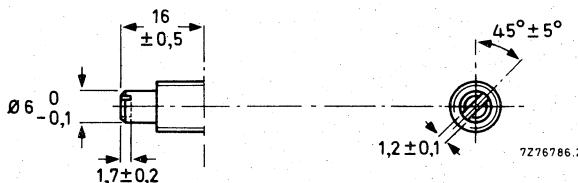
Spindle with screwdriver slot; spindle fully counter-clockwise.
